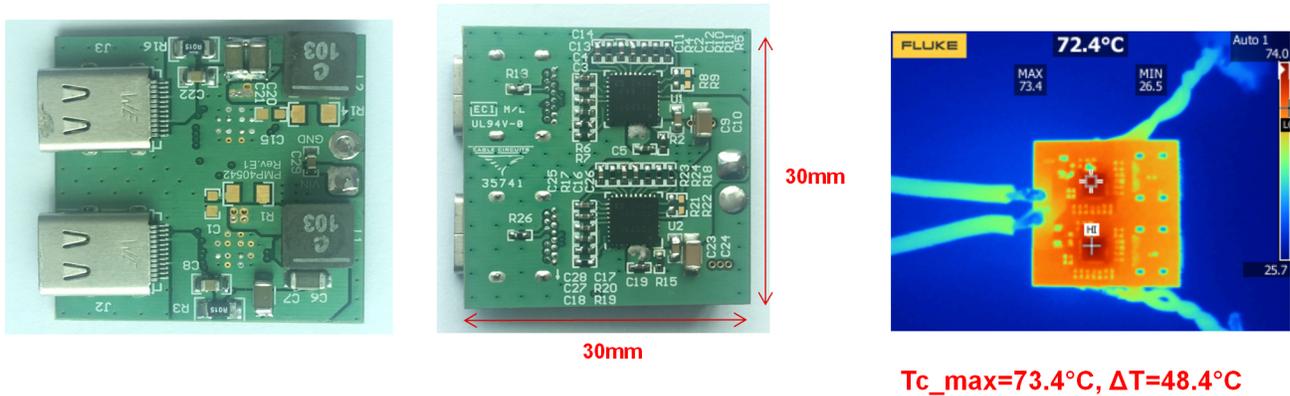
Dual Type-C Port PCB View and Thermal Performance
